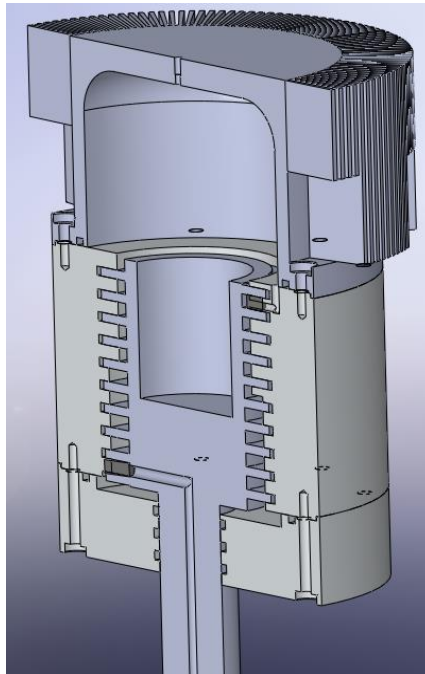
Configuration of threaded adjustable inertance tube
